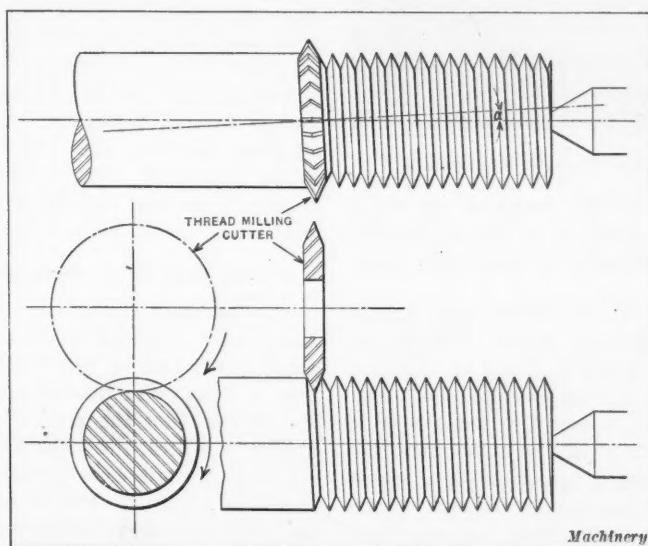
Diagram illustrating Method of milling Screw Thread with a Single Cutter
